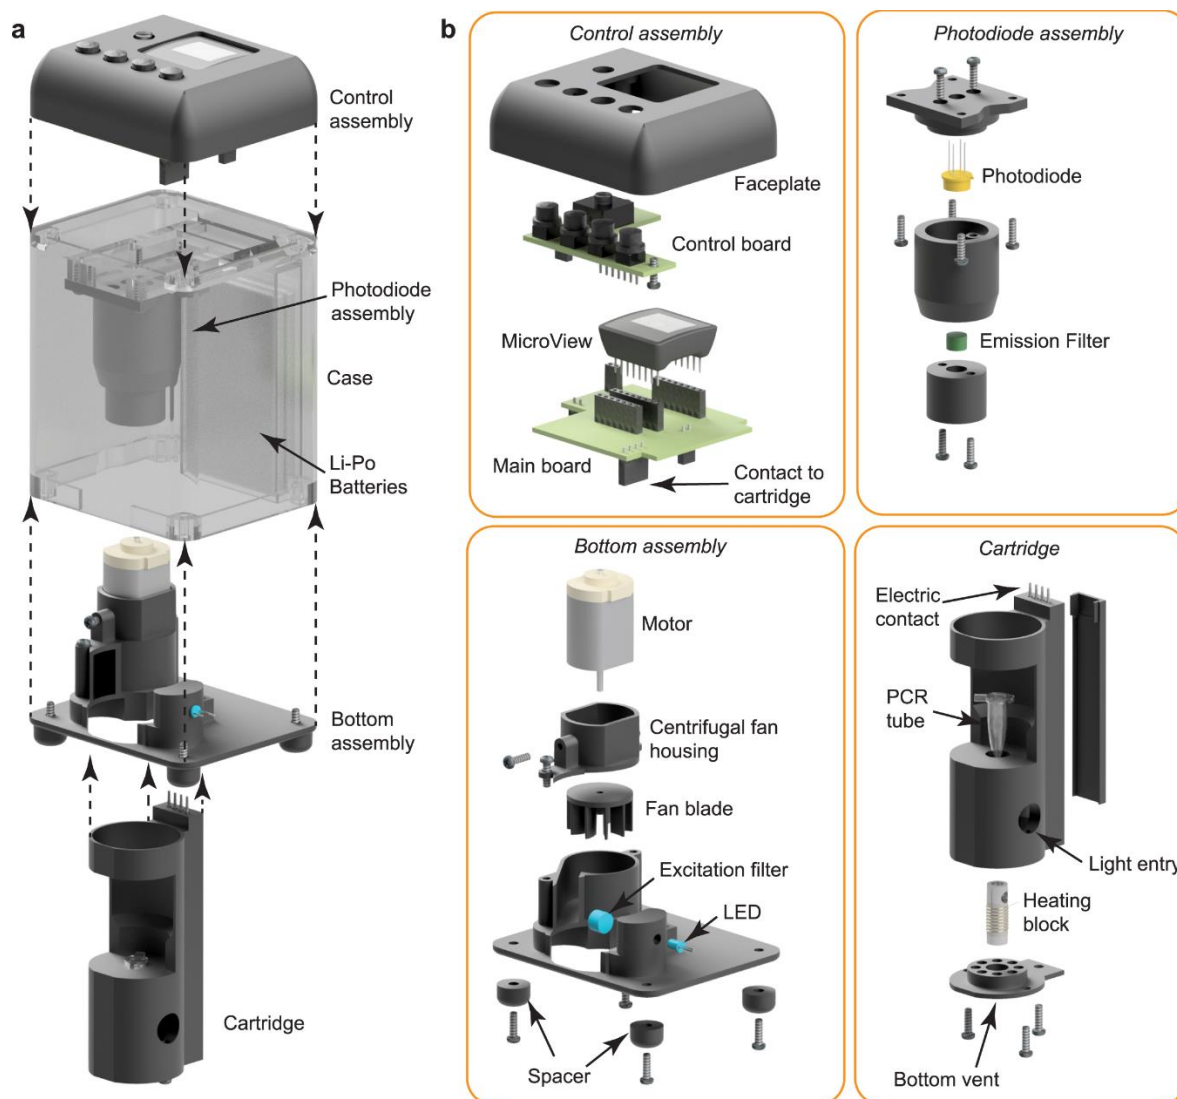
3D assembly of the system with exploded views. (a) The complete device showing locations of Control assembly, Photodiode assembly, Bottom assembly, Case, and Li-Po batteries. (b) Detail of assemblies. The Control assembly contains a faceplate, a control board, a main board, and a MicroView microcontroller. This assembly provides a user interface and houses all electronic controls. The Photodiode assembly contains the photodiode and emission filter. This assembly is used to determine the target DNA concentration present in the sample. The bottom assembly contains a motor, a fan blade, spacers, and a centrifugal fan housing, forming the cooling fan system. It also contains an LED and excitation filter, establishing the light source for illuminating the sample. The cartridge is a removable assembly allowing for easy insertion of the PCR tube containing the sample. It contains the heating block, electrical contacts for connection to the main board, and a vented bottom plate allowing for the escape of warm air. © 2017 PLoS
